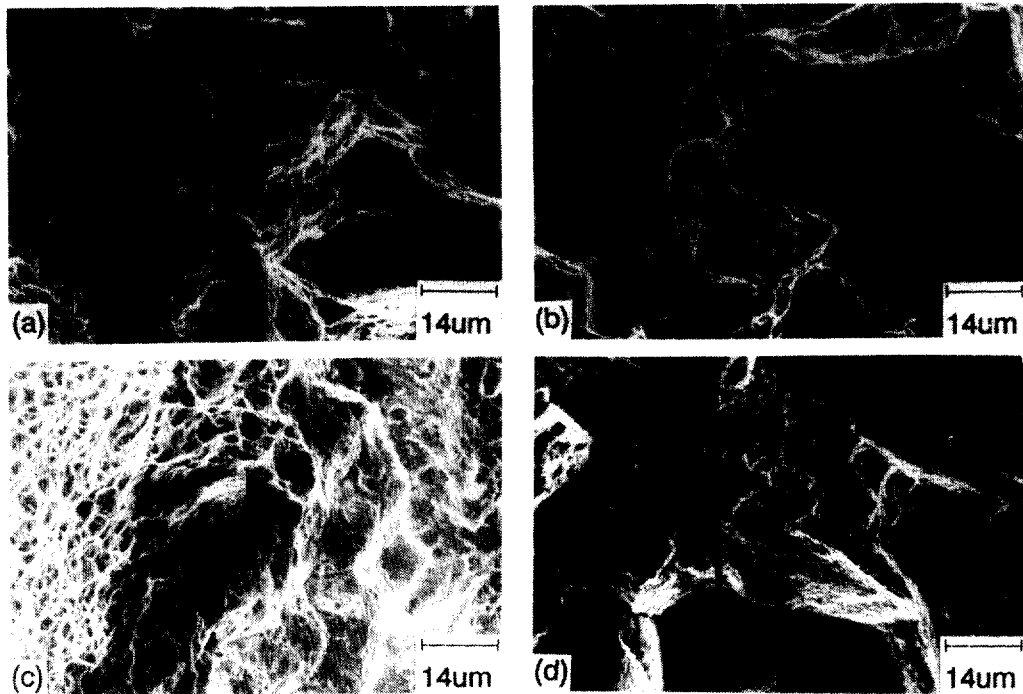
SEM fractography observed from SMAW weld metal tested at cathodic potential of -1029mV . (a) and (b) Fractography around crack tip. (c) and (d) Fractography in crack path.
